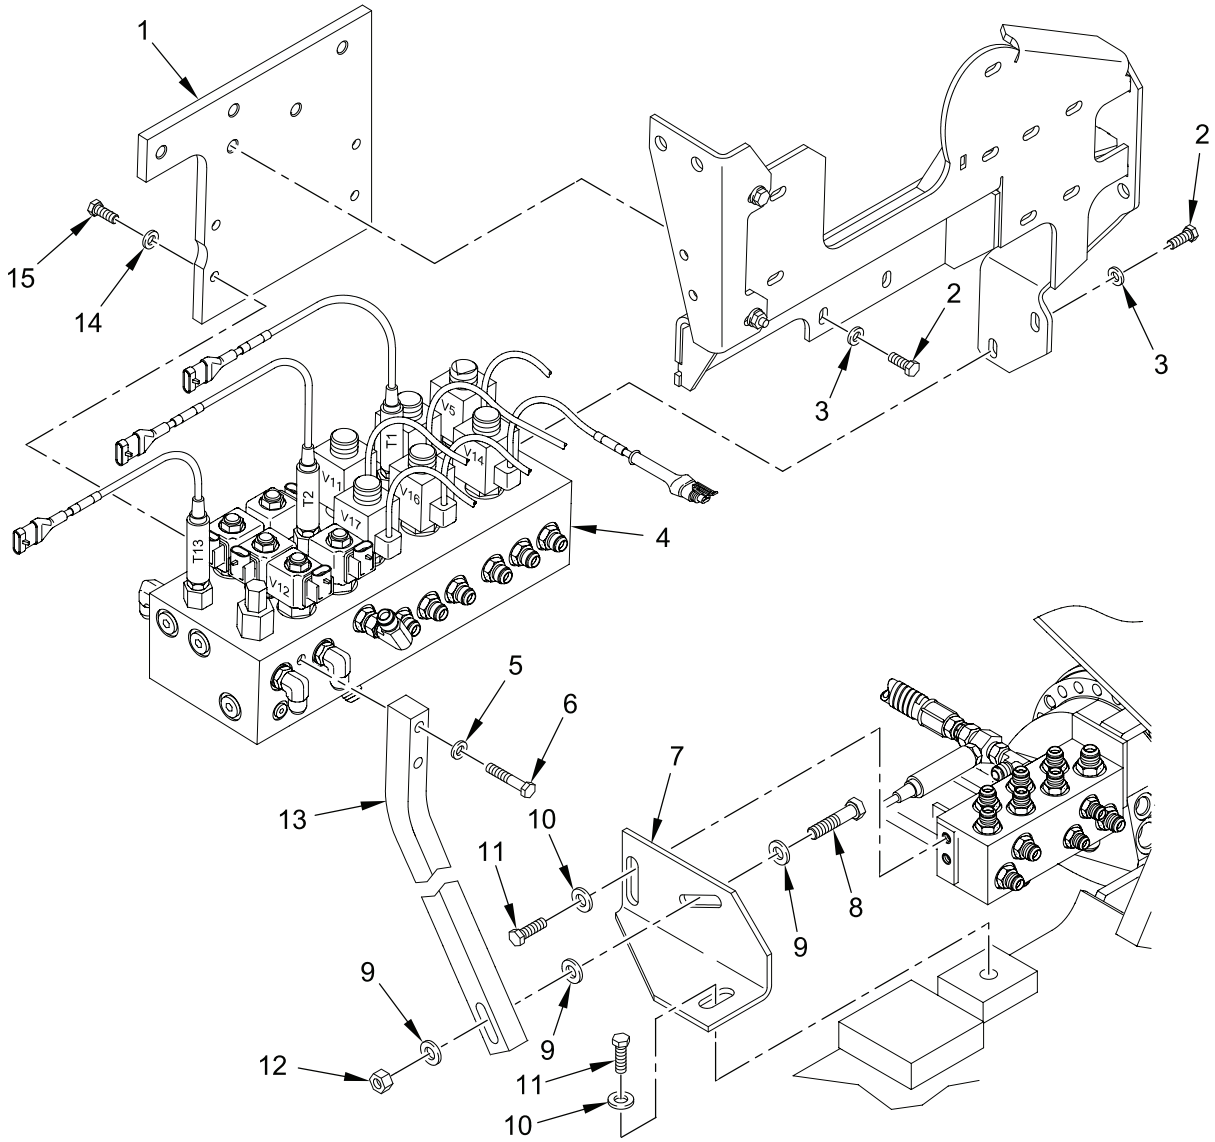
Installing HDC Primary Manifold Assembly and Mounting Bracket
